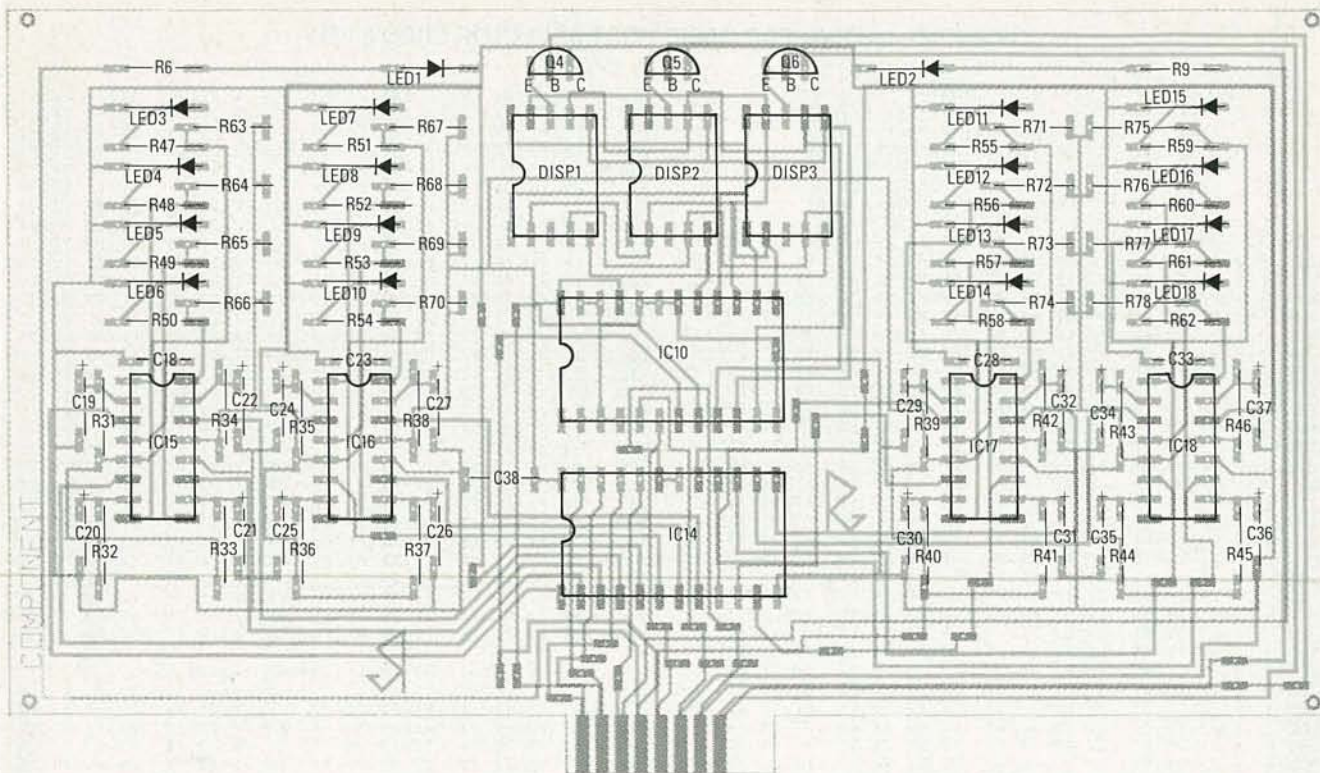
DISPLAY BOARD PARTS PLACEMENT DIAGRAM.
